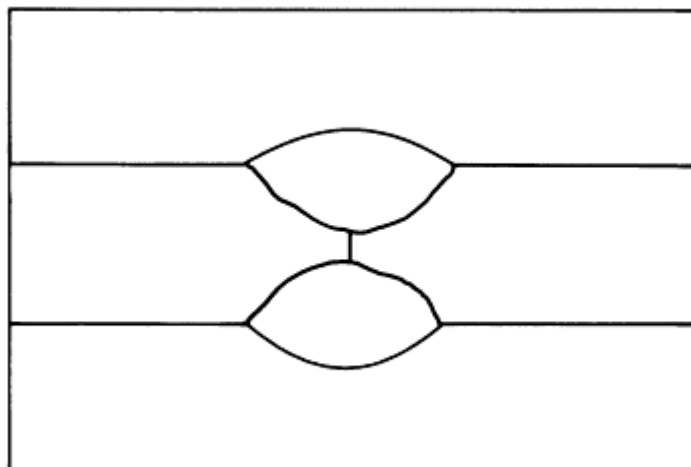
INCOMPLETE PENETRATION OF WELD INTO BUTT JOINT
